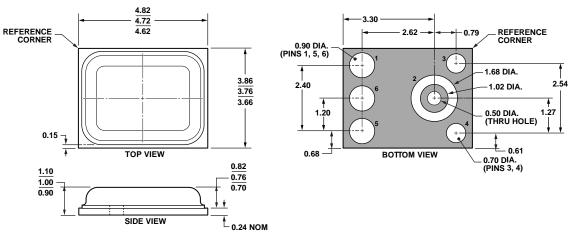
6-Terminal Chip Array Small Outline No Lead Cavity [LGA_CAV] 4.72 mm × 3.76 mm Body (CE-6-1) Dimensions shown in millimeters
